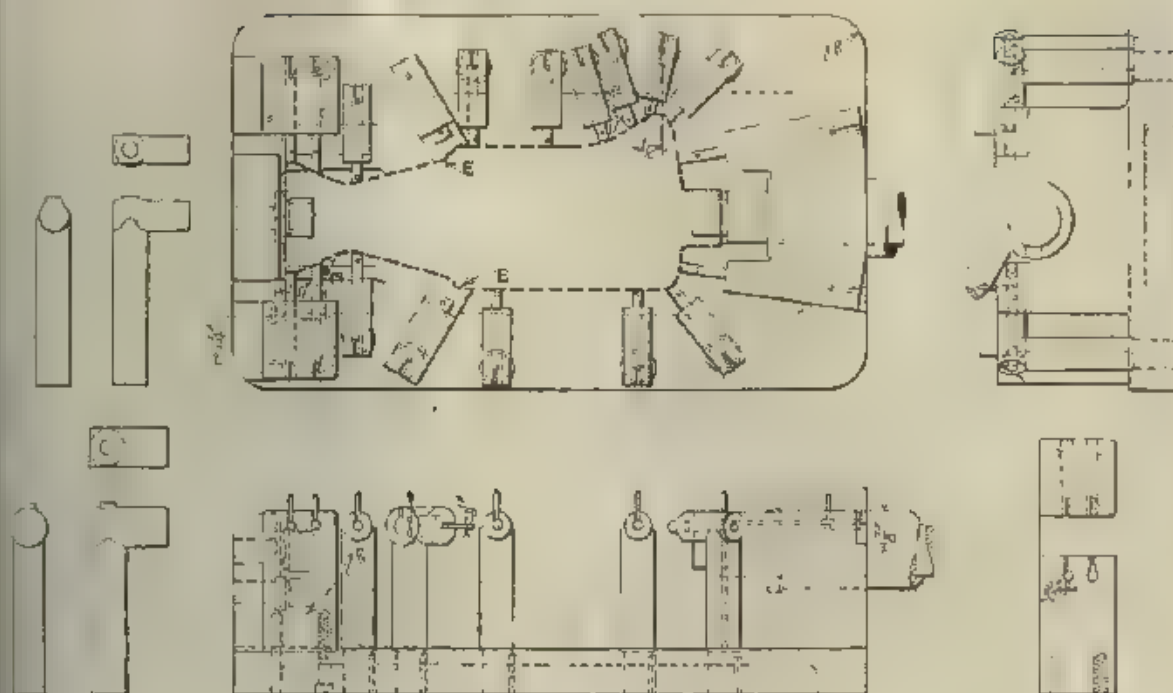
GAGING FIXTURE FOR RECEIVER CONTOUR
